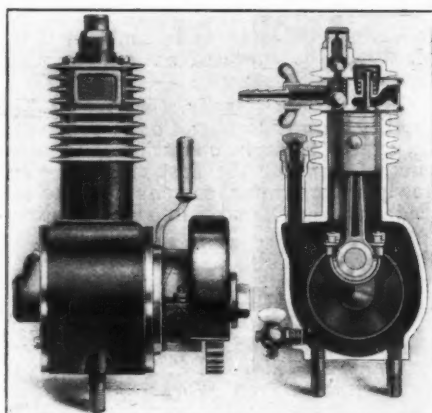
Side elevation of one-cylinder Aero pump and section through pump cylinder
